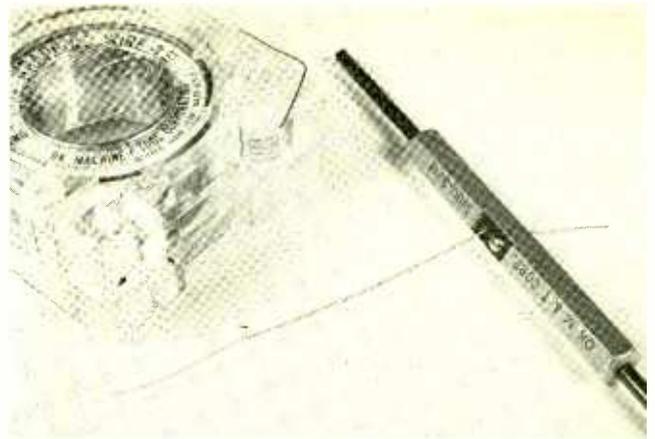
WIRE DISPENSER and wrap/unwrap tool available from OK Machine and Tool Corp.
